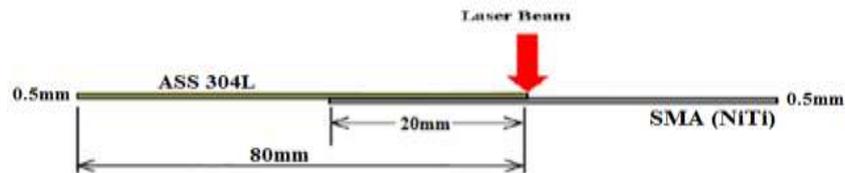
Schematic diagram illustrating the centerline welding lap joint
